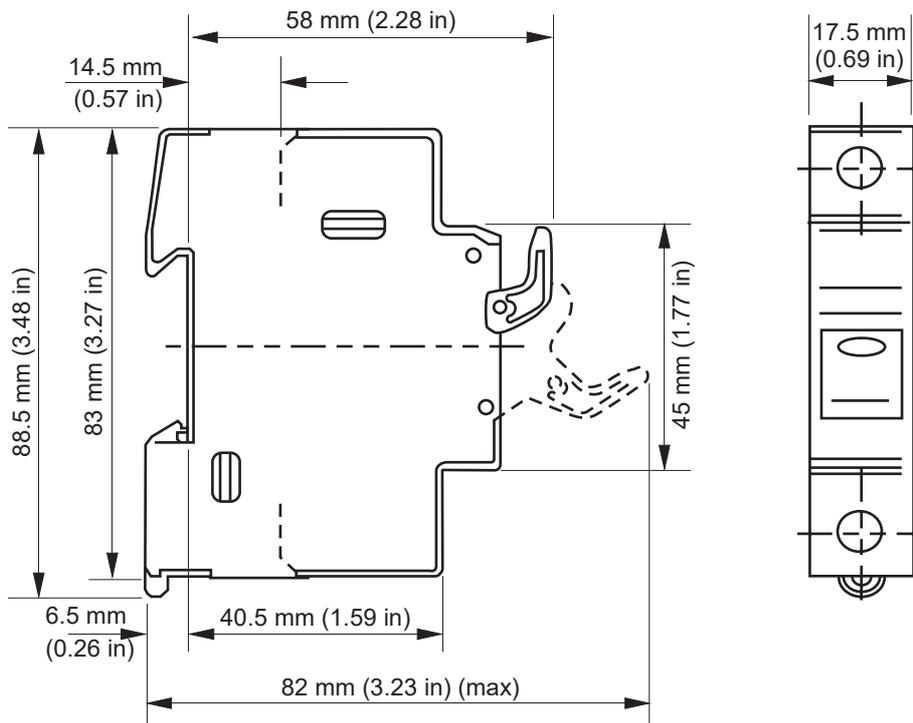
Fuse holder dimensions: US101 (10x38mm)
